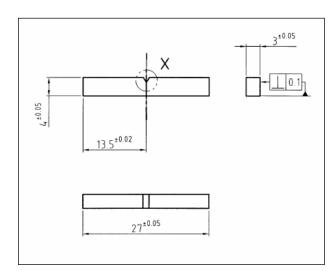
Miniaturized KLST-Charpy specimen (all dimensions in mm).
